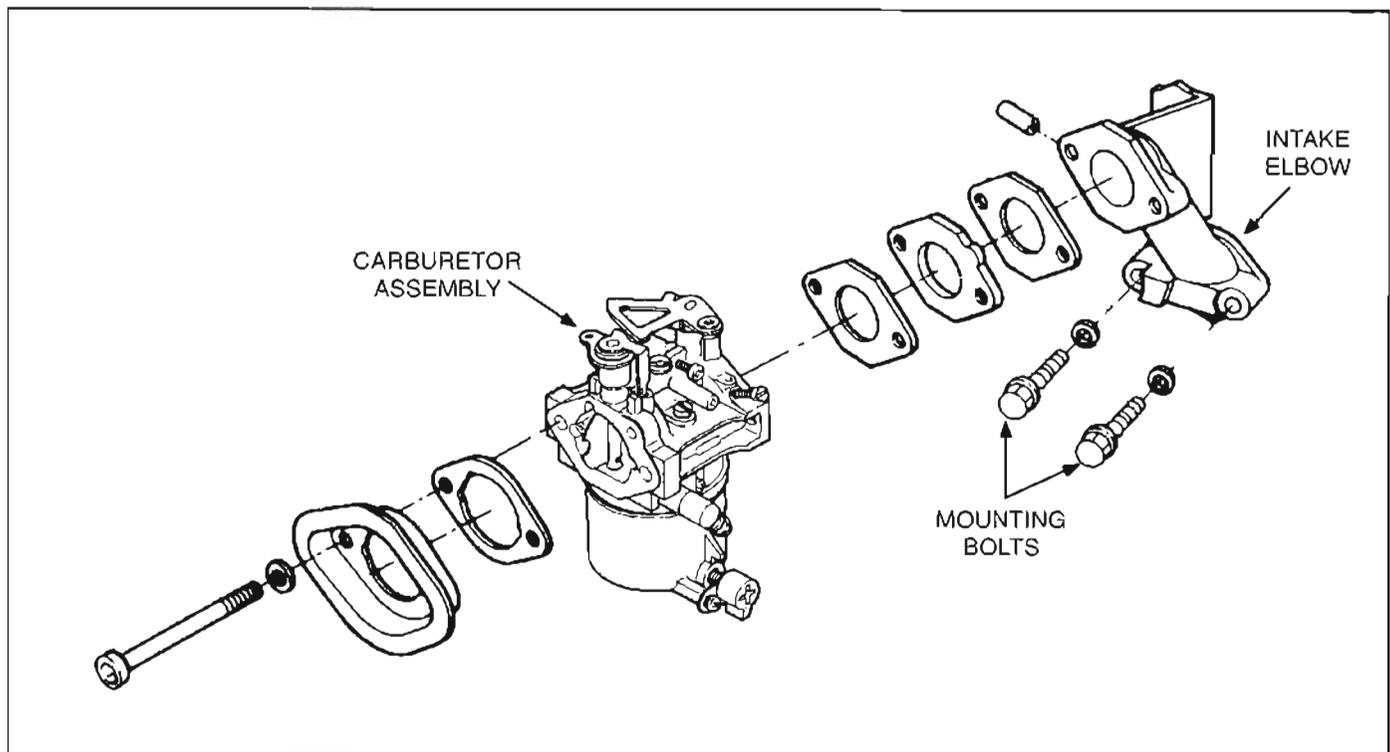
CARBURETOR AND INTAKE MANIFOLD ASSEMBLY
